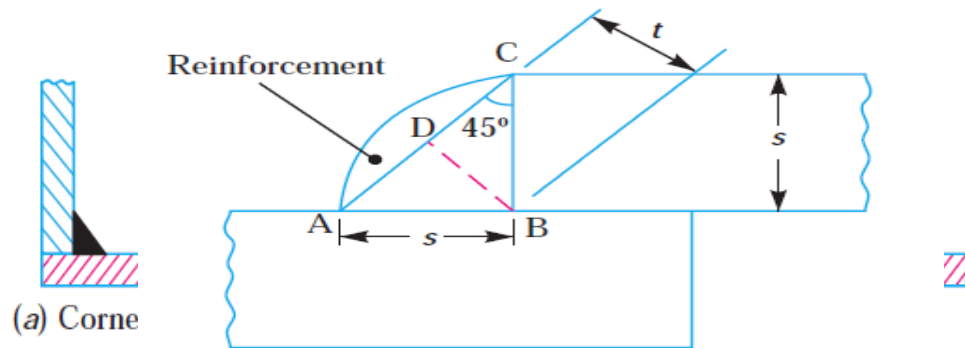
Enlarged view of a fillet weld.
